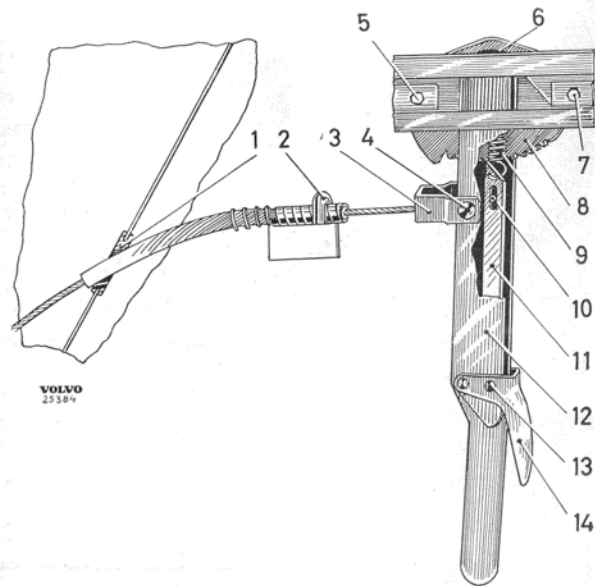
Handbrake control, PV 444 chassis numbers 1-12504.
